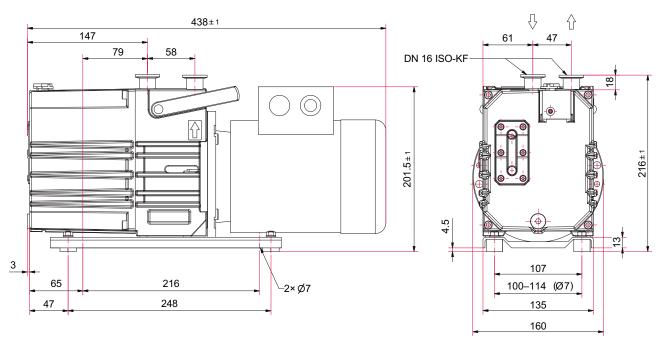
Dimension diagram Duo 5 M | three-phase motor
